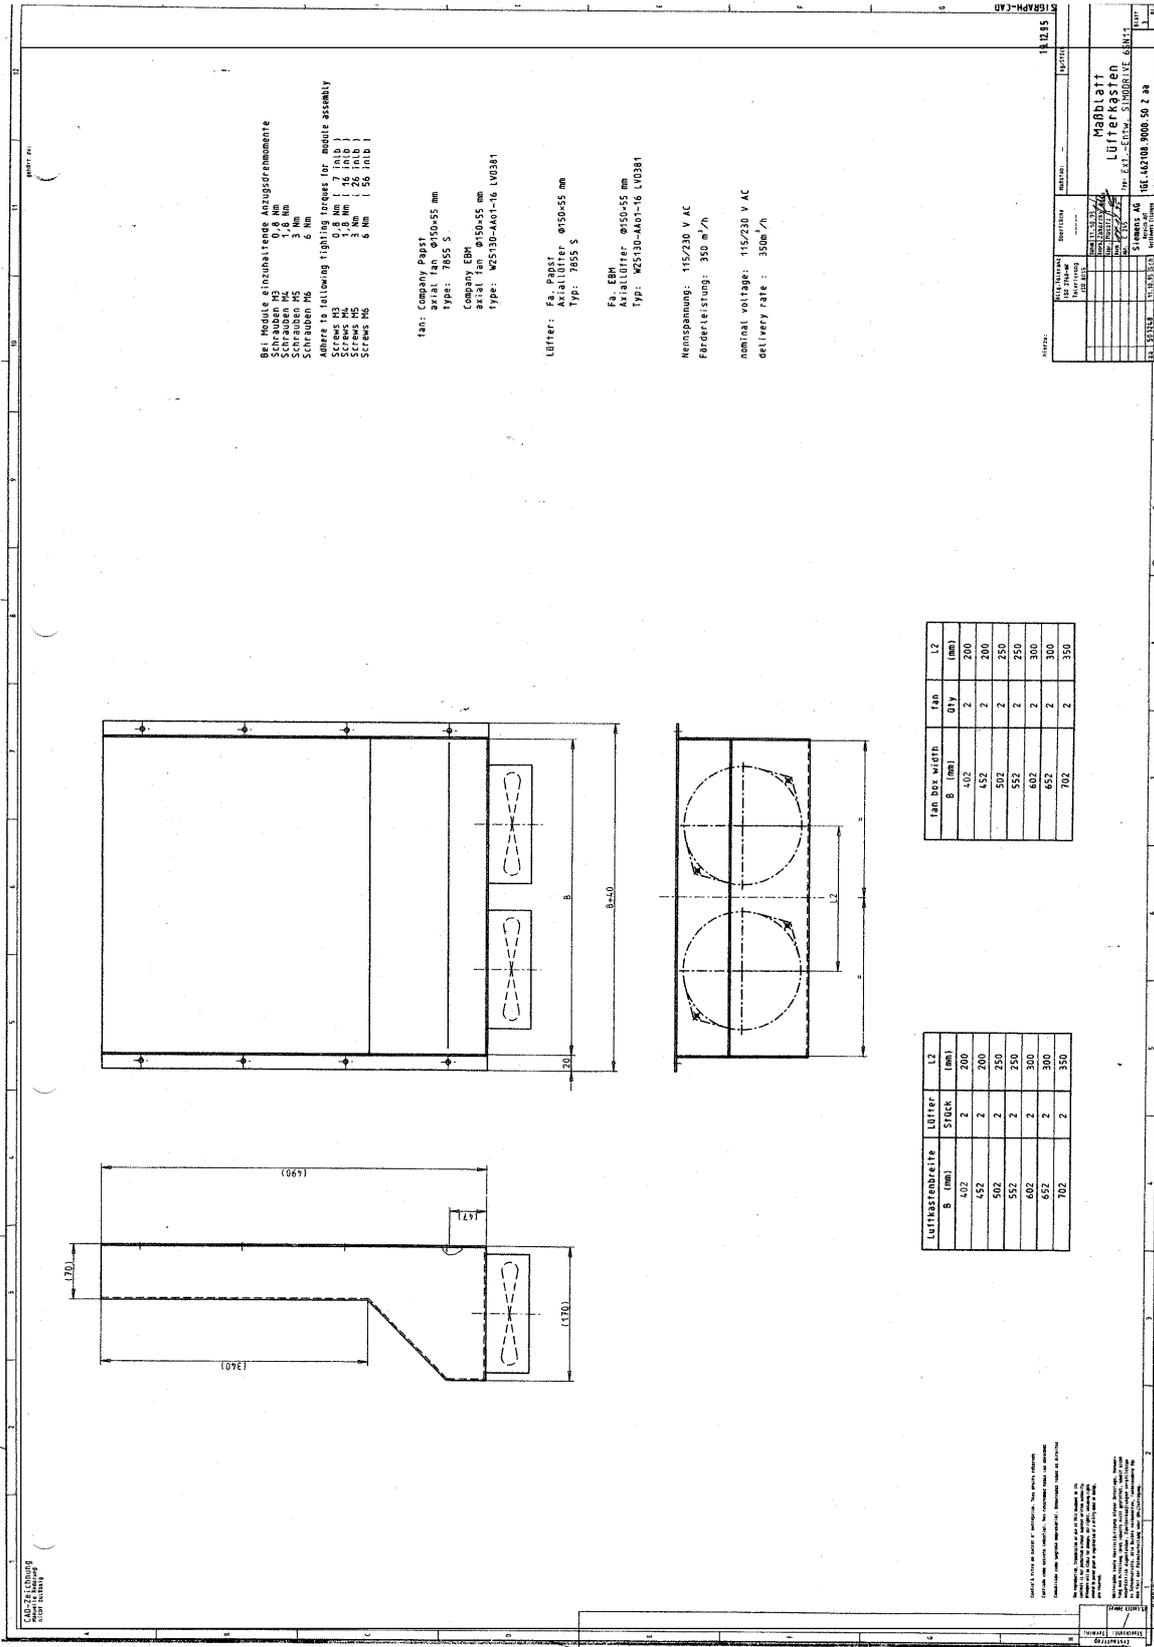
Fan assembly, ext. cooling, 1GE.462108.9000.50 Z aa, Sheet 3
